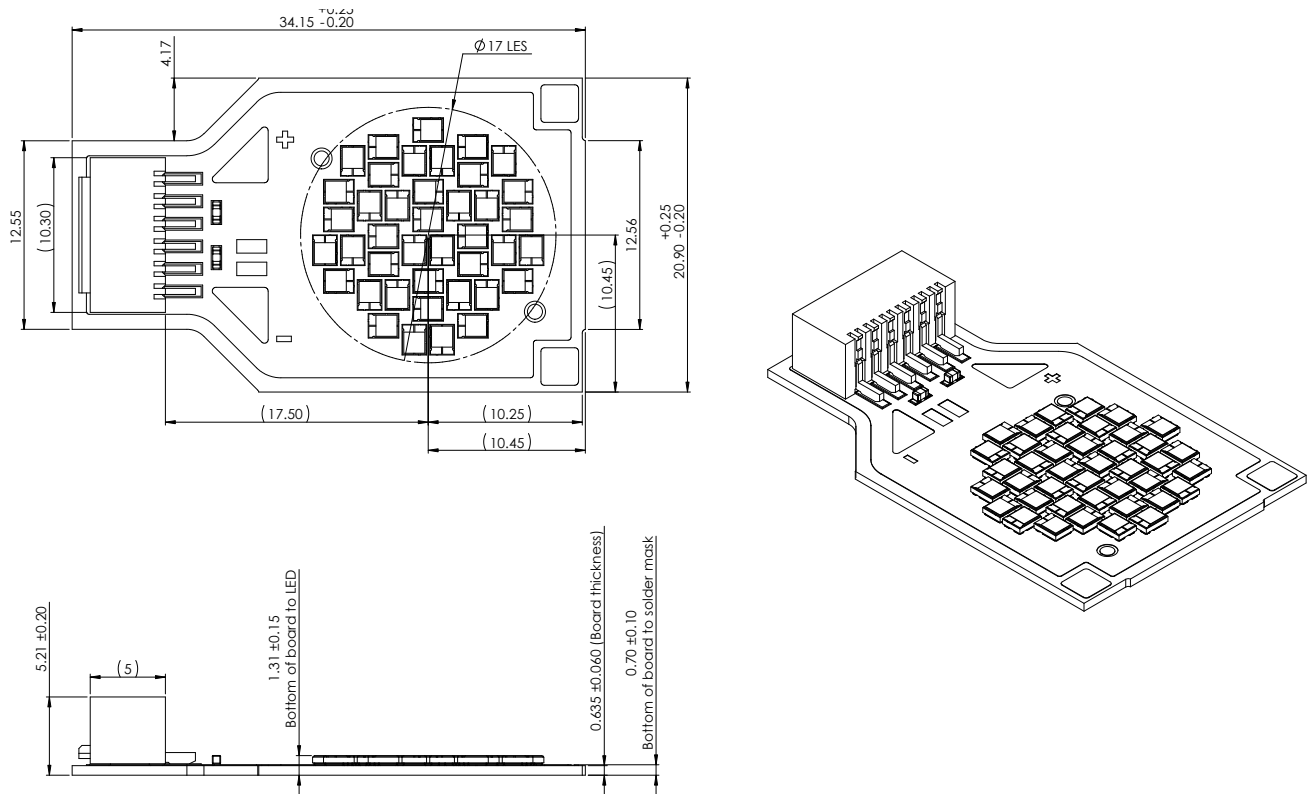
Package outline drawing for LUXEON S5000 / LXSx-Pxxx-004I.
